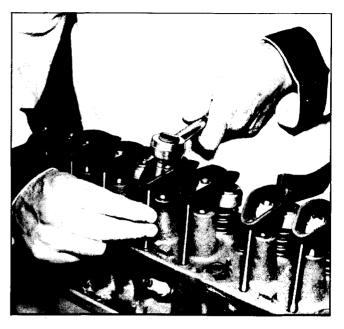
Adjusting Valve Train Lash - 307 Engine
